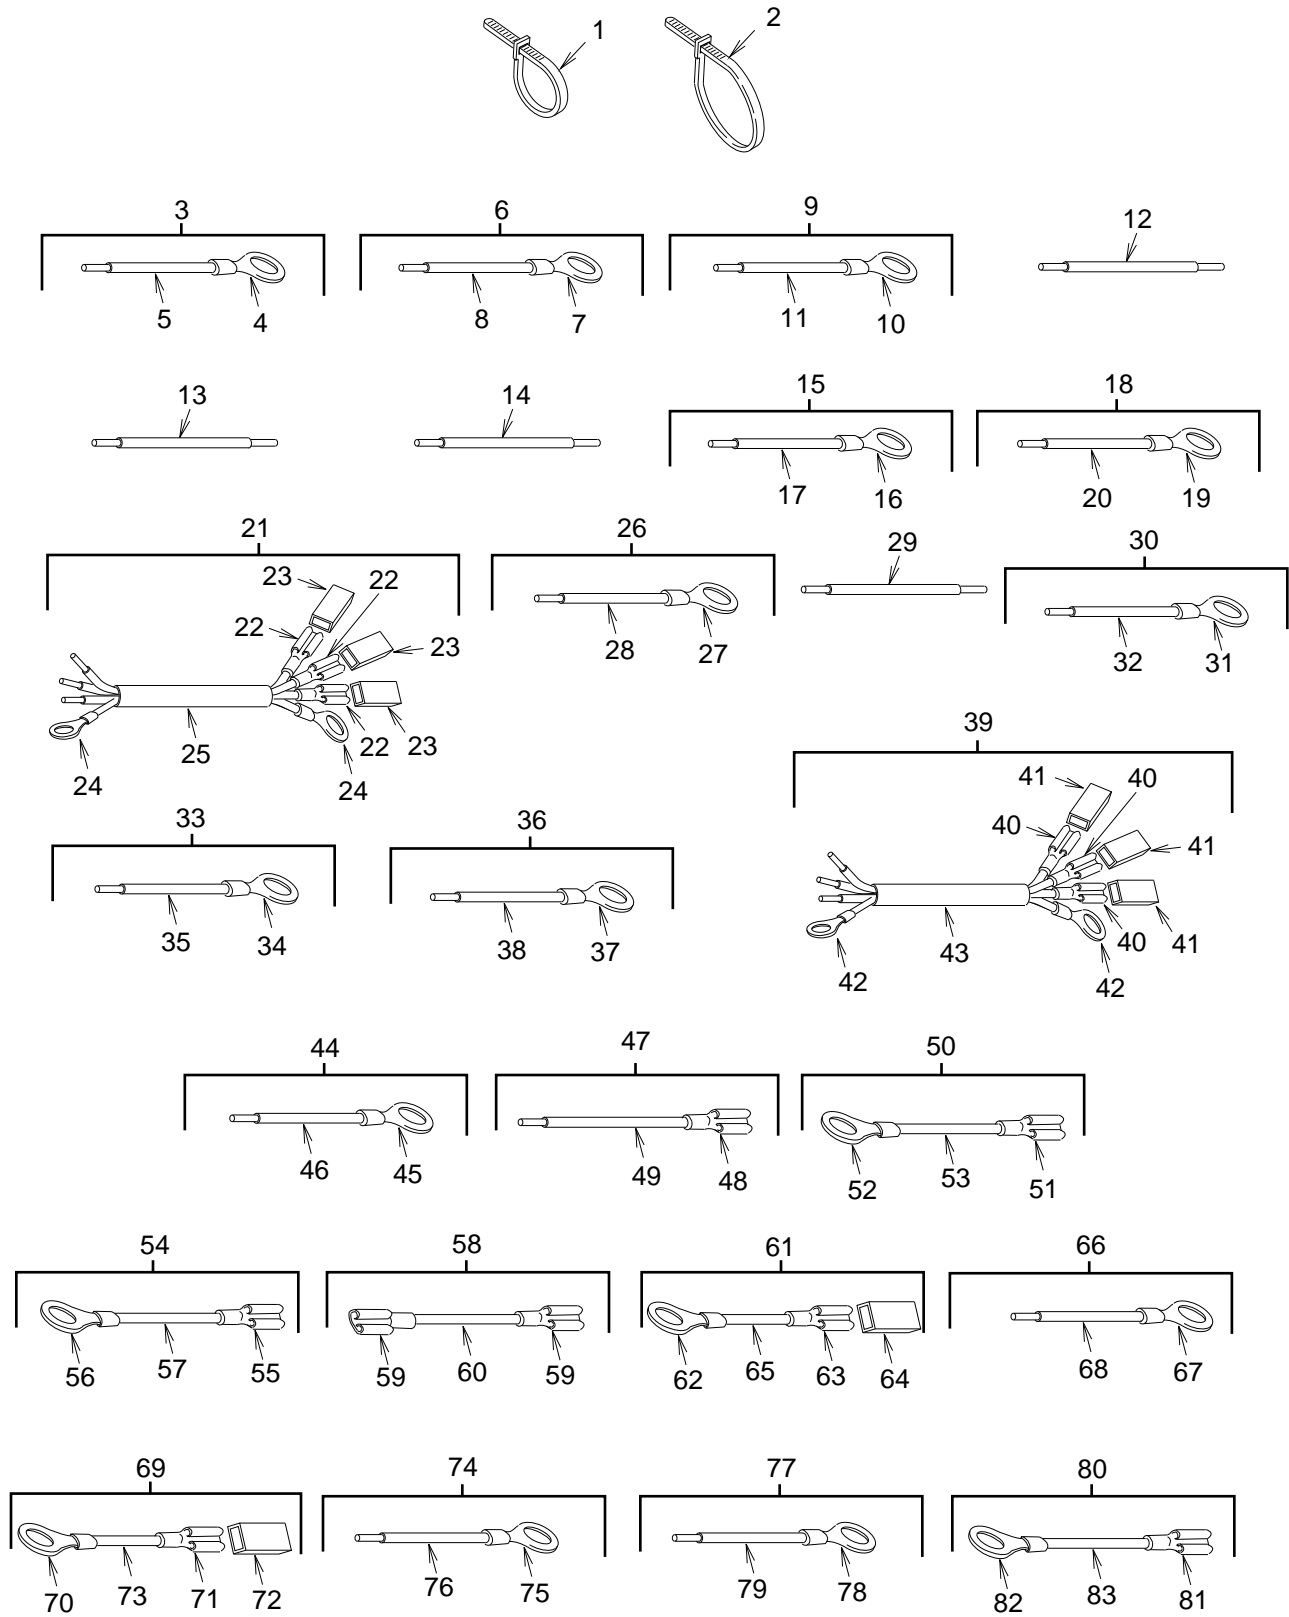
Control Box Wires and Cables (Sheet 1 of 2)
